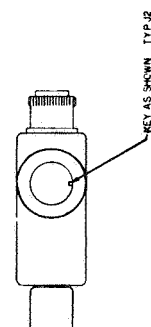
Molded Tee Adapter (Sheet 1 of 2)
